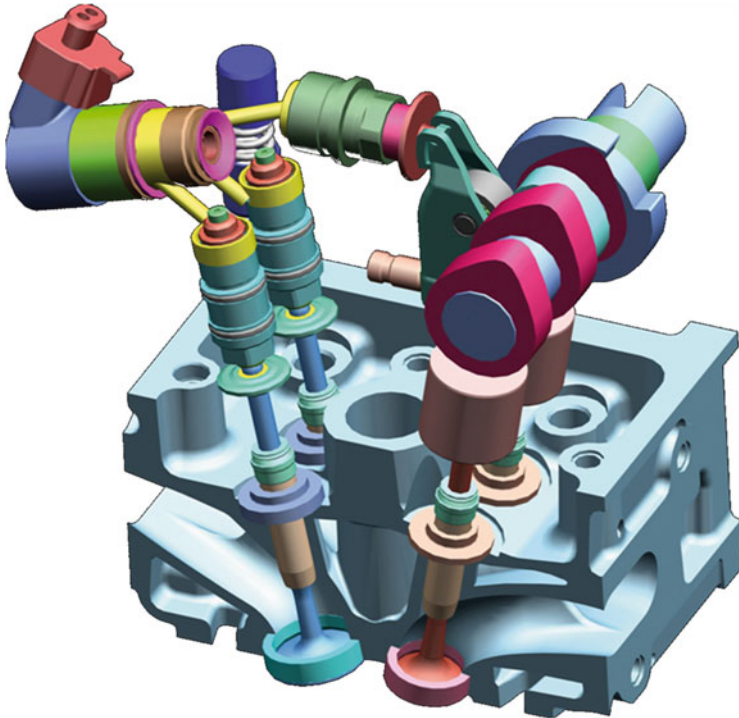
Combined hydraulic-electromagnetic valve control
